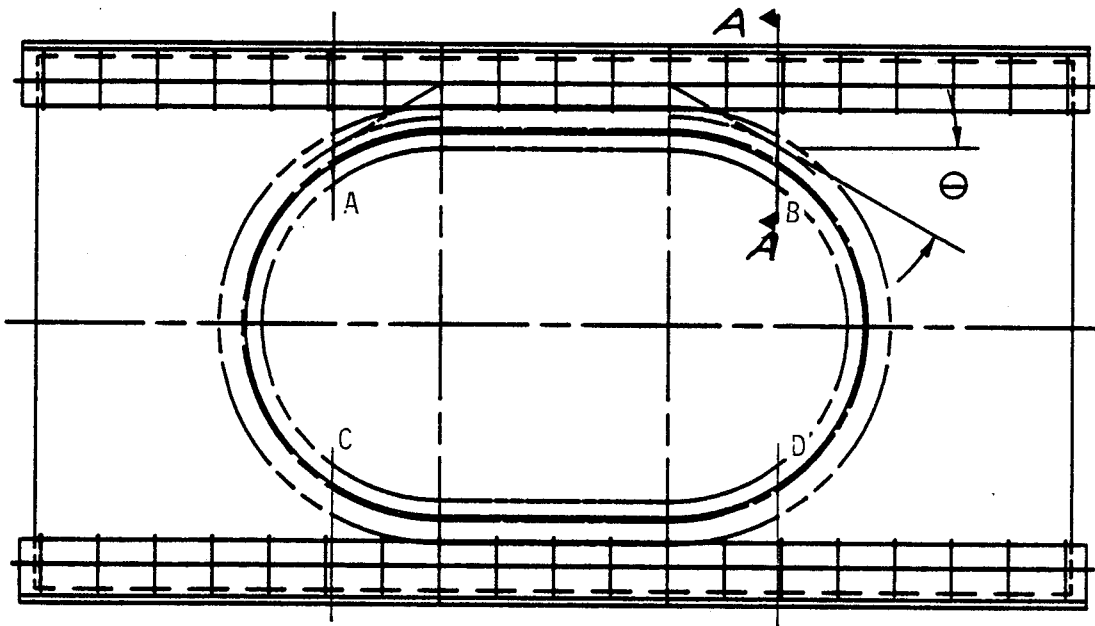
Floor Beam Cutout - Sheet Metal
